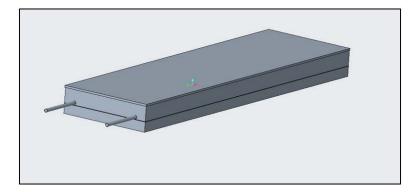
CAD model with a copper tube positioned underneath the copper plate
